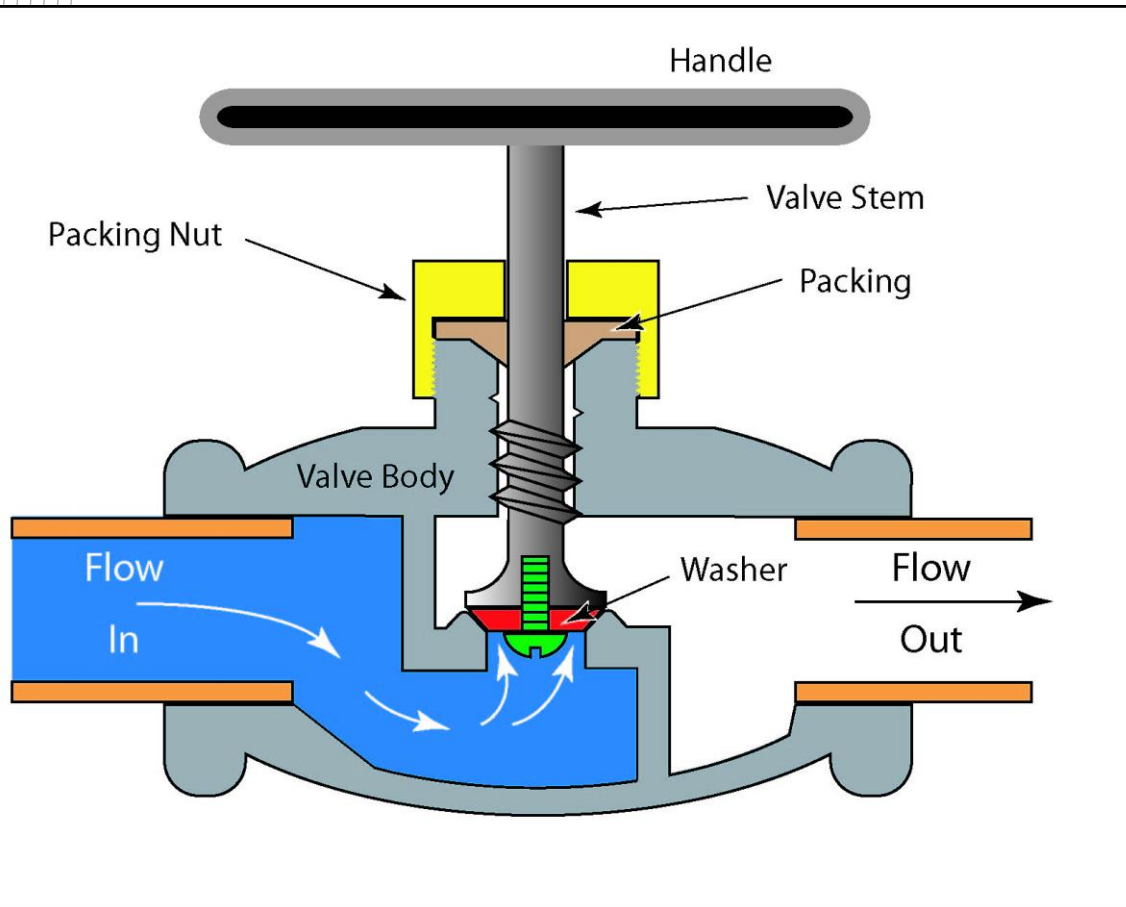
Cutaway view of globe valve. (Courtesy of Jenkins Bros.)
